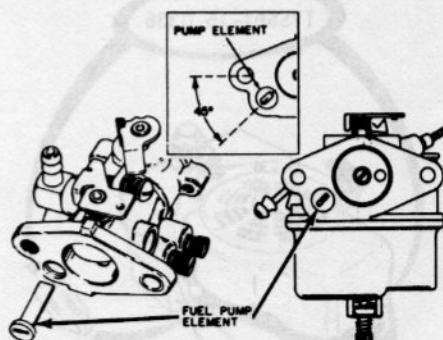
The fuel pumping element should be installed at 45 degree angle as shown for Tecumseh diaphragm type carburetor (left) and float type carburetor (right).
